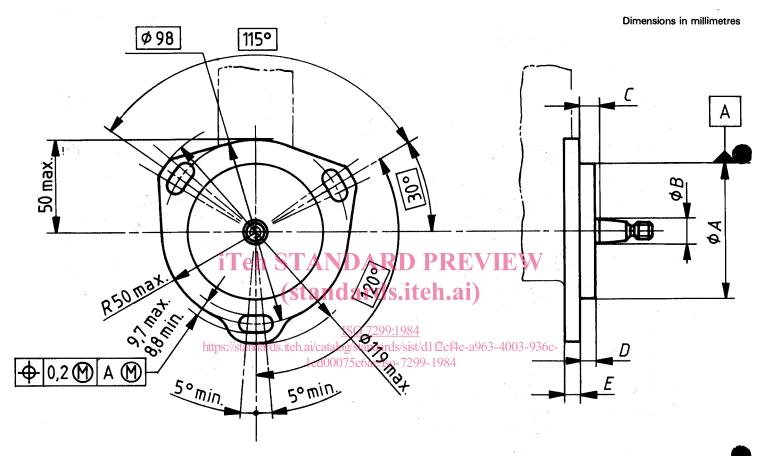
In-line fuel injection pumps — Type 5 end-mounting flange
